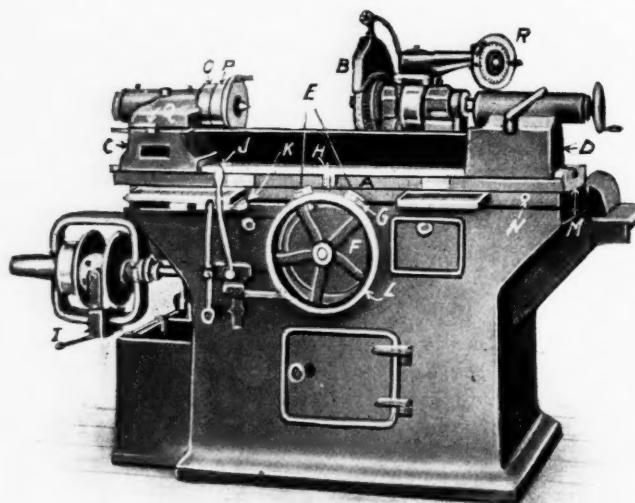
A Universal Grinding Machine built by the Landis Tool Co.
